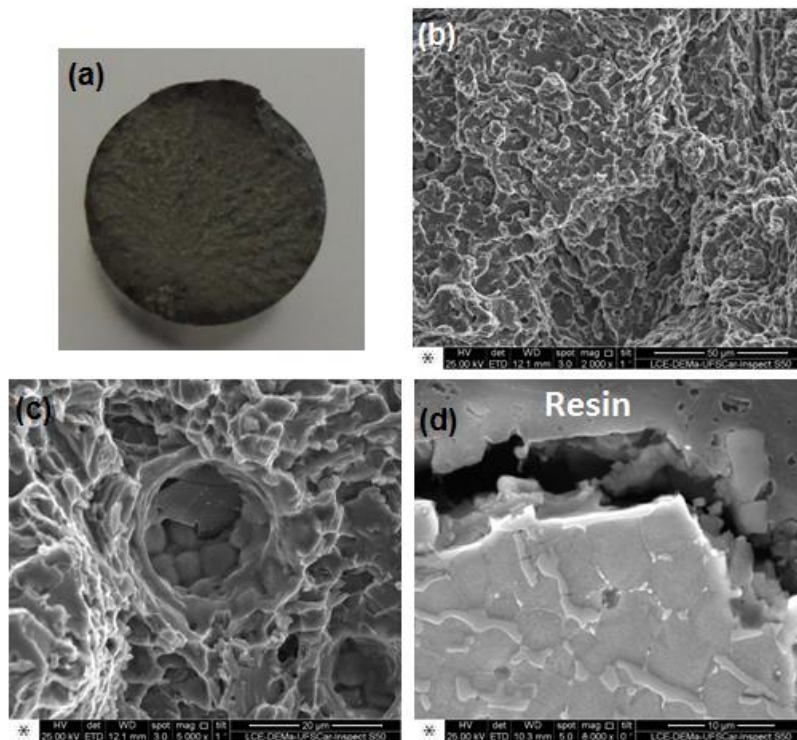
(a) Photography and (b)-(c) SEM image of the brittle fracture (specimen 1) of the as-spray formed SM-14Cr-1B. (d) Longitudinal view of the fracture.
